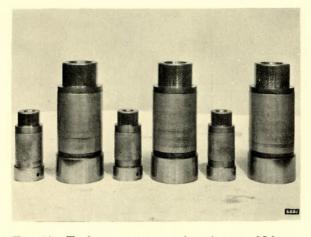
Turbo-generator gearing in s.s. Neleus: planet pins of first and second train; loaded side of pins
